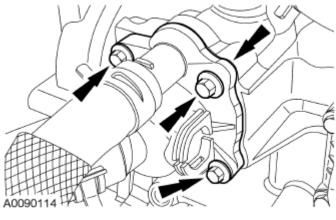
Locating Thermostat Housing And Bolts Courtesy of FORD MOTOR CO.
